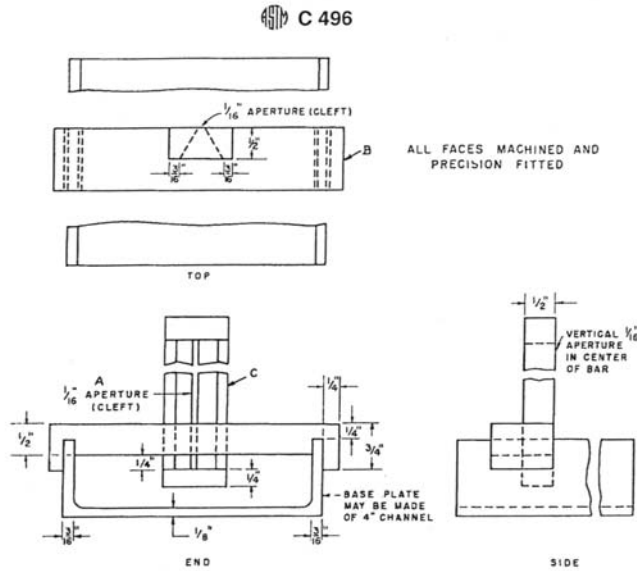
General Views of a Suitable Apparatus for Marking End Diameters Used for Alignment of Specimen in Testing Machine
